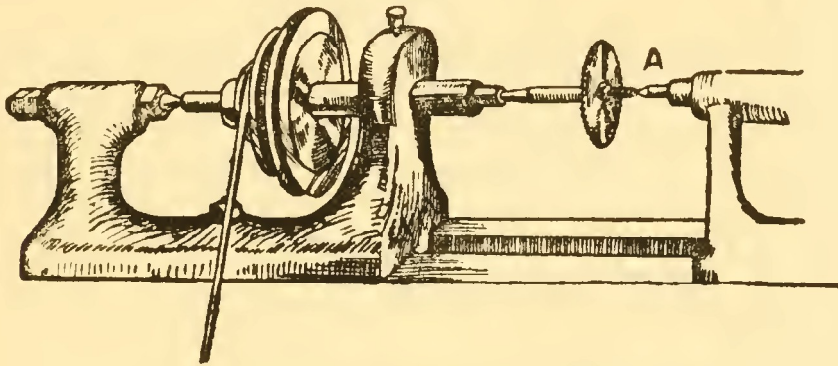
SAW SPINDLE AND SAW IN LATHE.
